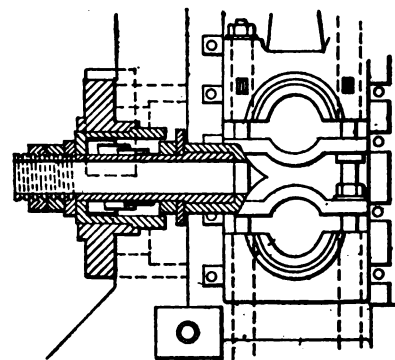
Bearings for the rolls and exit guide on a small Pilgrim rolling mill.
